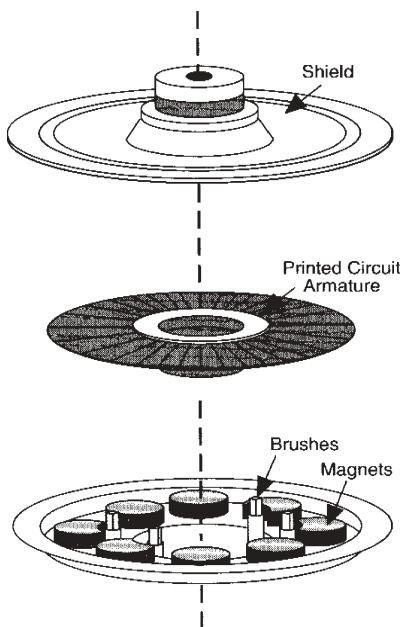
Basic stator and armature construction of a printed circuit (PC) motor.
